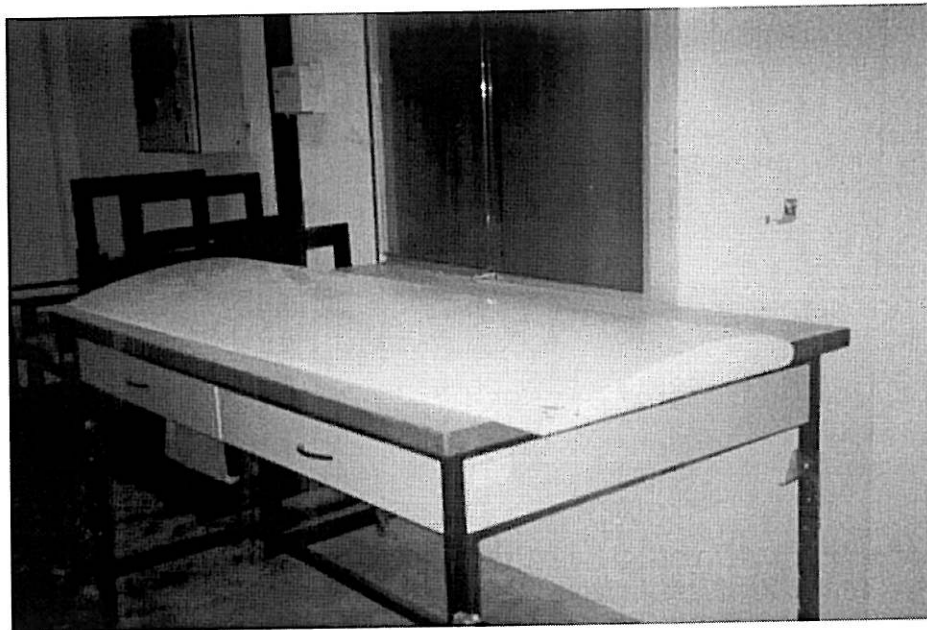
Finished product fabricated using fibre glass, however inside is the foam.
